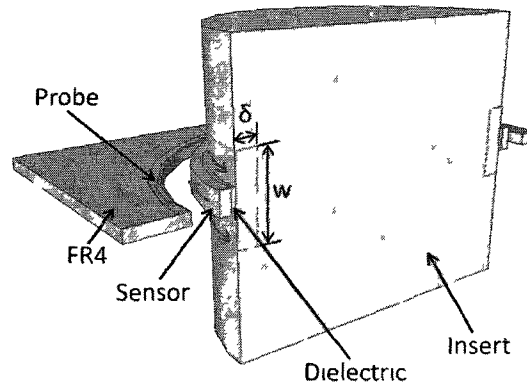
Cross-sectional view of probe, sensor, and insert
